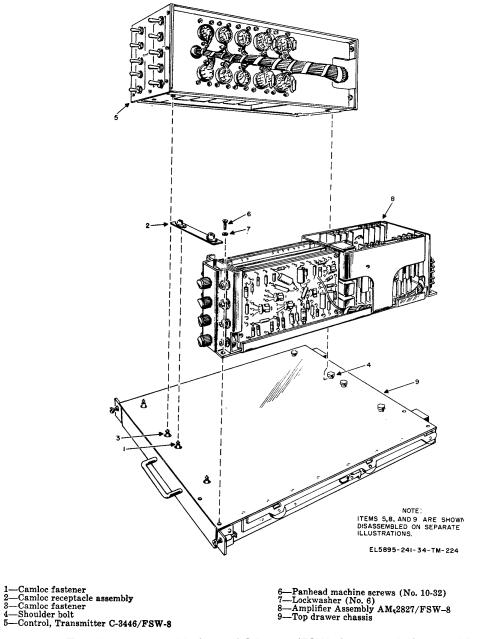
Top drawer assembly (part of OA-2055/FSW-8), removal of assemblies.
